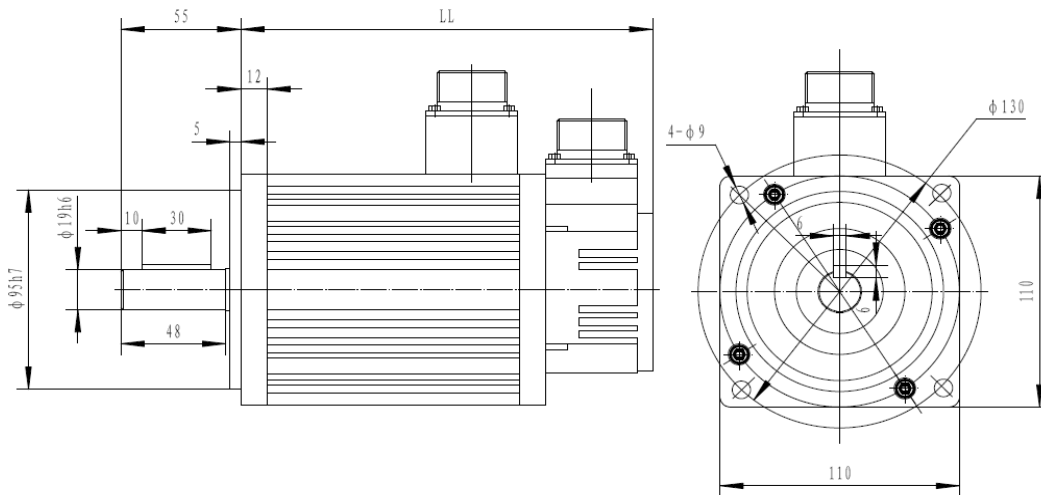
The dimension of 110 series AC servo motor (unit:mm)
